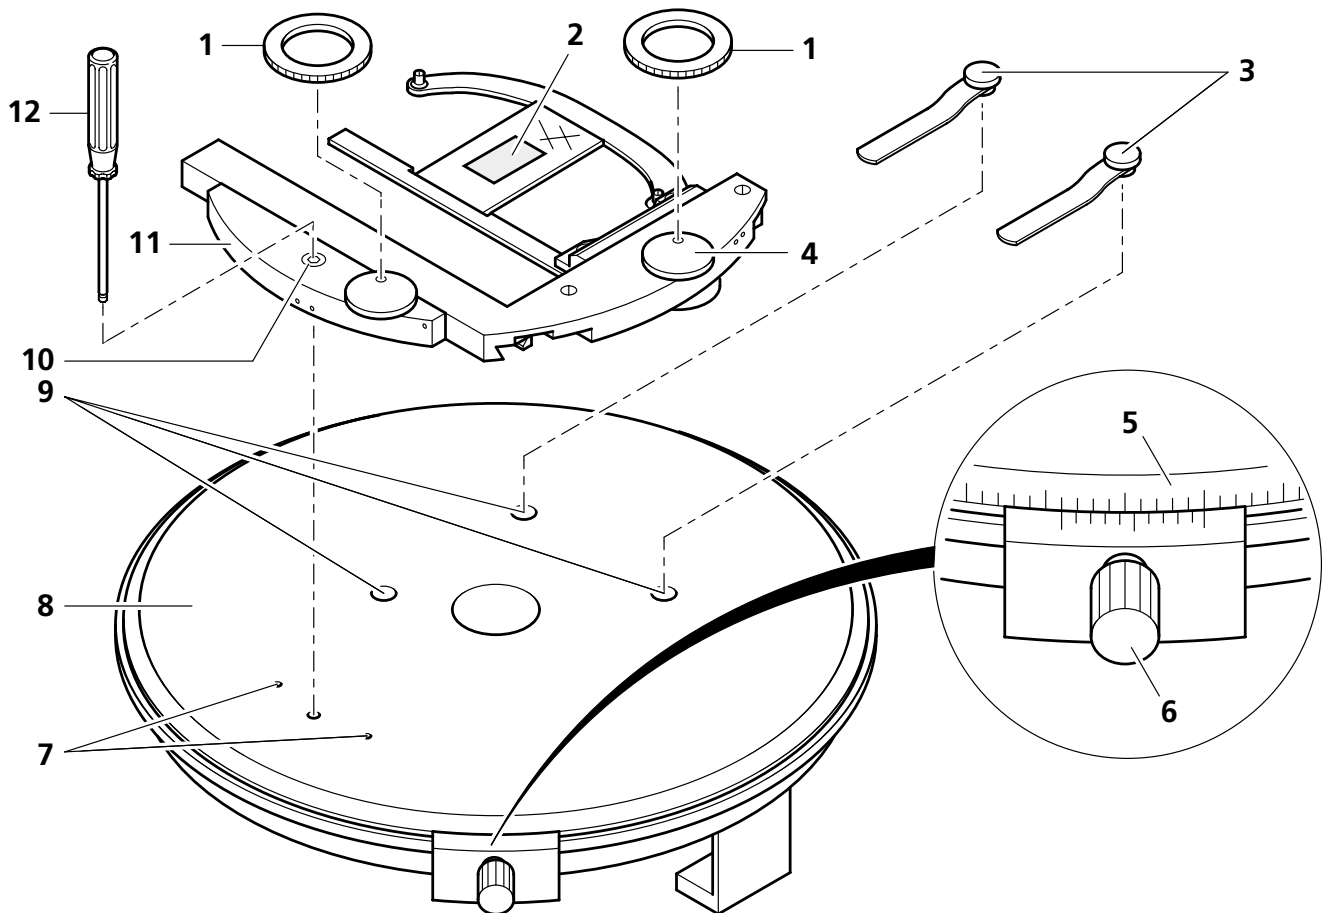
Pol rotary stage- setting of specimen mount and stop
